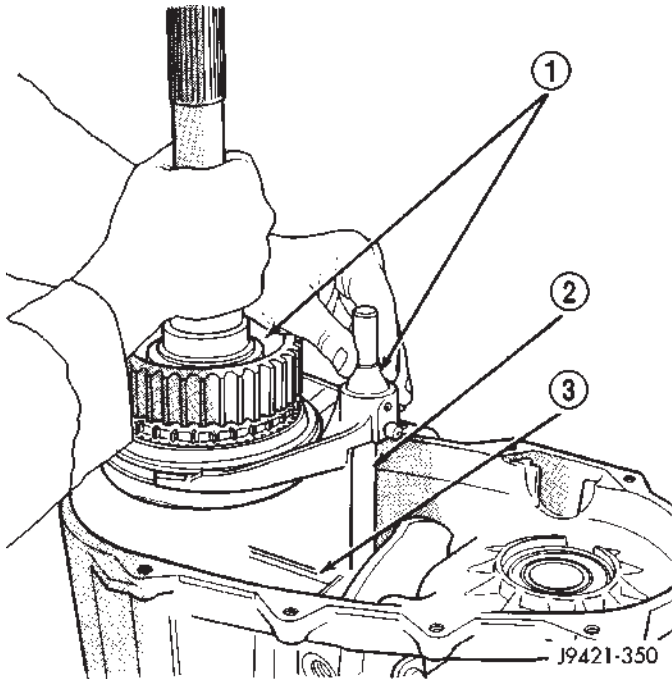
Installing Mainshaft And Mode Fork Assembly
